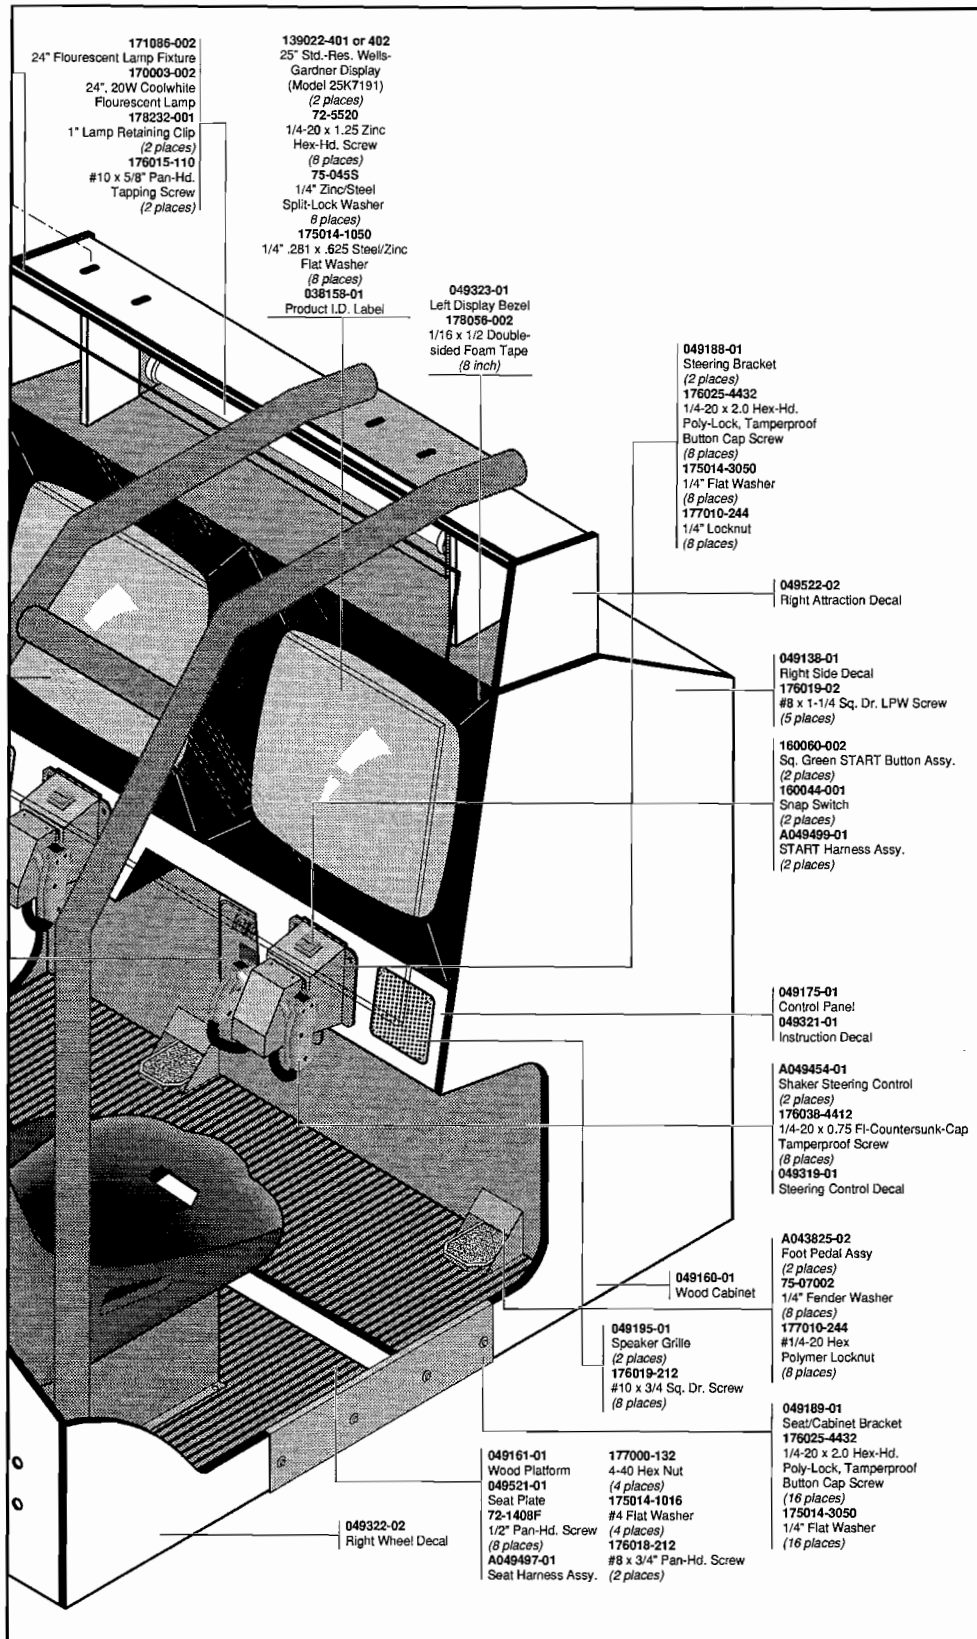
Cabinet-Mounted Assemblies, Front View
